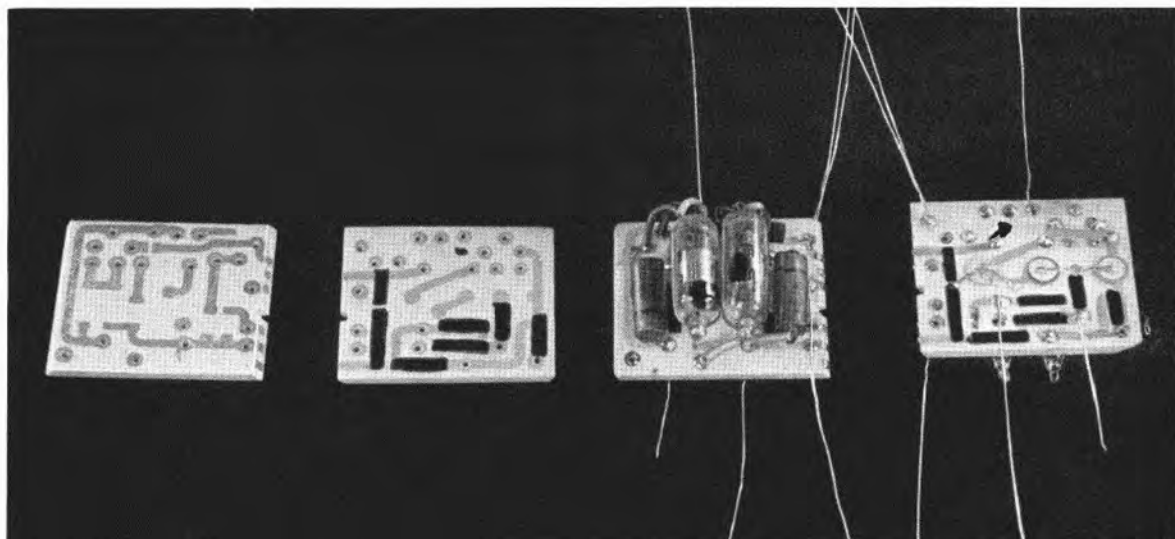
Components and assembly of ceramic-type amplifier, late version (Globe-Union, Inc., photograph).
